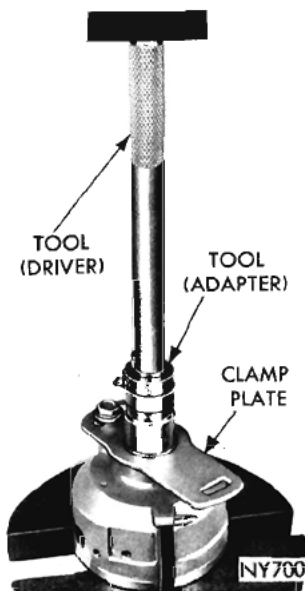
Installing Distributor Housing Lower Bushing (Typical)
